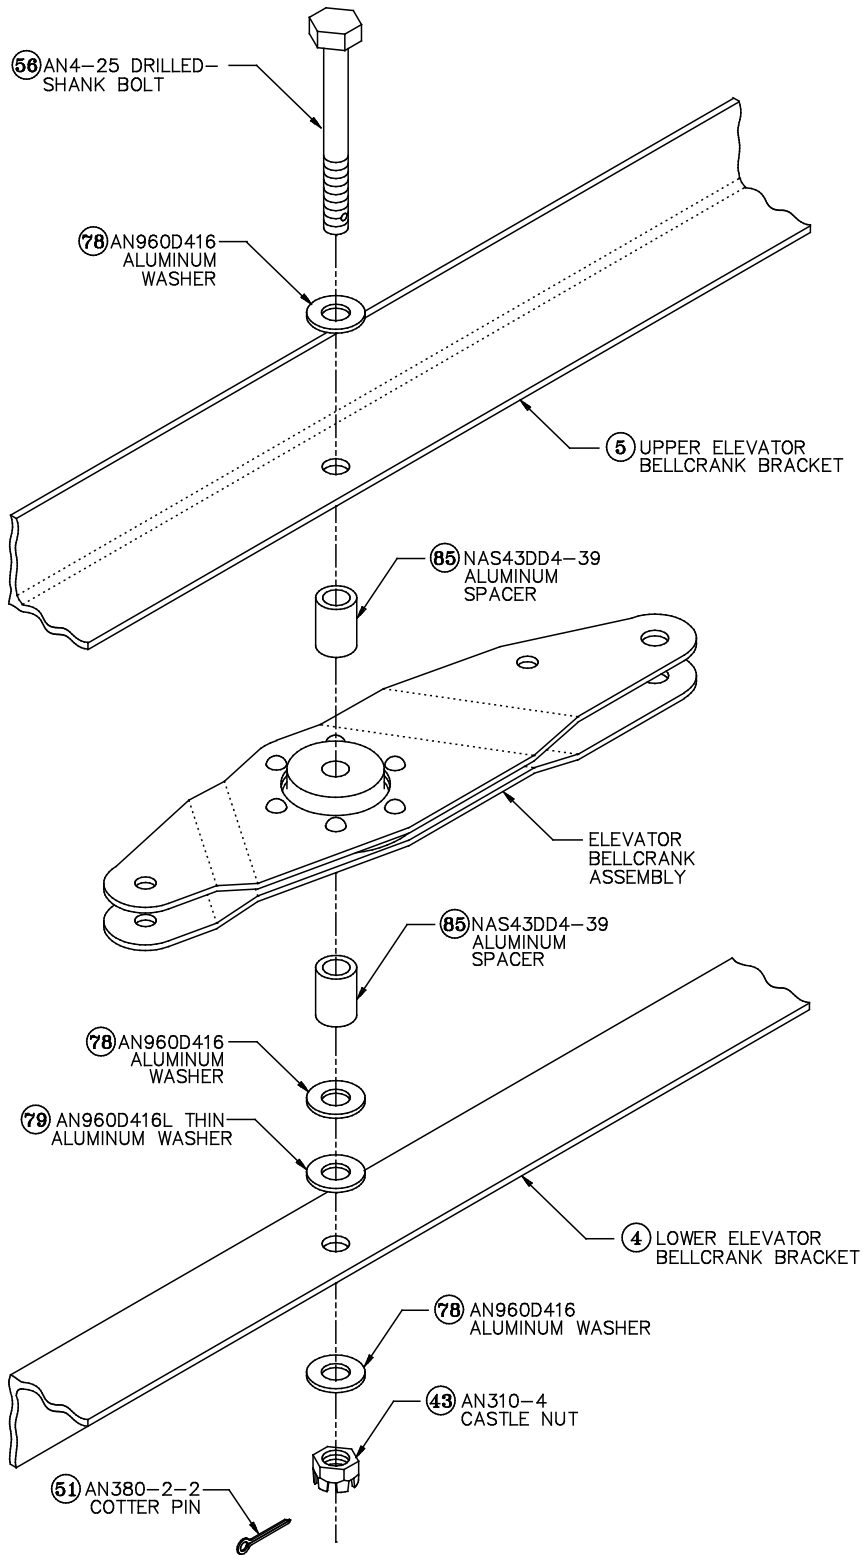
Installing the Elevator Bellcrank Assembly Between the Brackets
